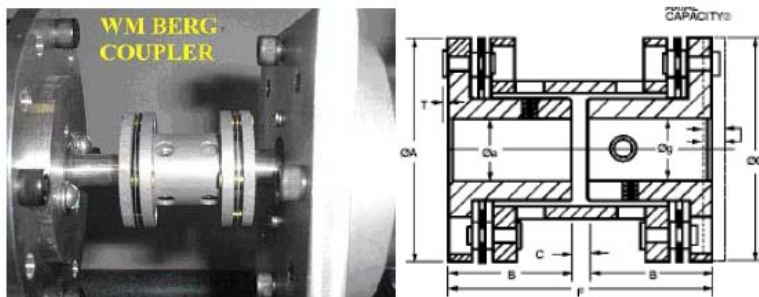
WM Berg, Inc. coupler – left; CAD drawing – right
